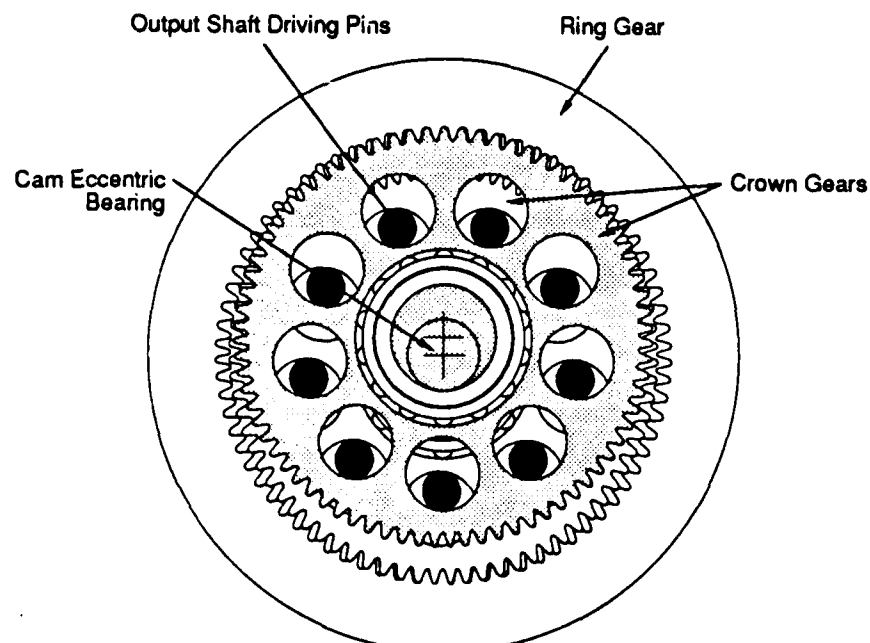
Cycloidal Principle in the REDEX CORBAC unit, illustrating the use of crown gears (3) riding on the indexable inner gear (4), while transmitting torque to the output shaft driving pins (1).
